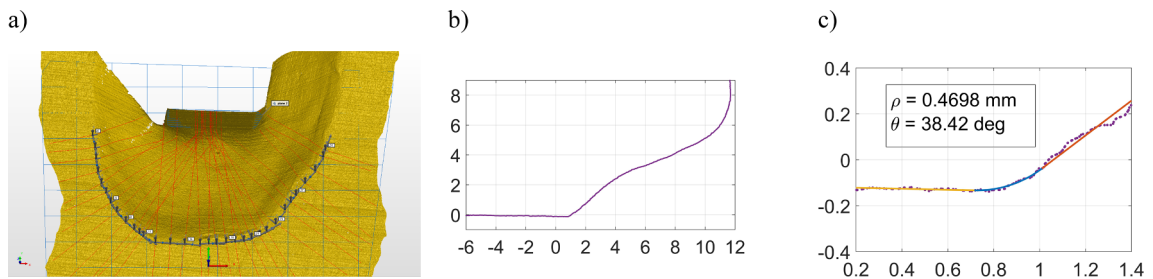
Local weld toe geometry for a longitudinal attachment, a) 3D laser scan overview, b) extracted profile, c) local weld toe geometry - fitted simplified profile to determine θ and ρ (scale: mm).
